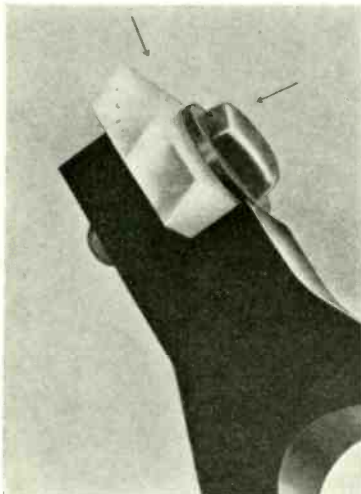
AN ENLARGED VIEW OF THE CUTTER SHOWING THE METHOD OF MOUNTING.
